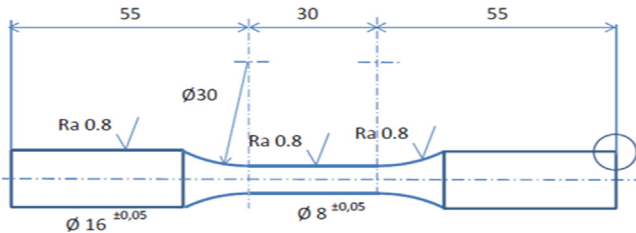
Geometry of specimens for uniaxial and tension-torsion fatigue test.
